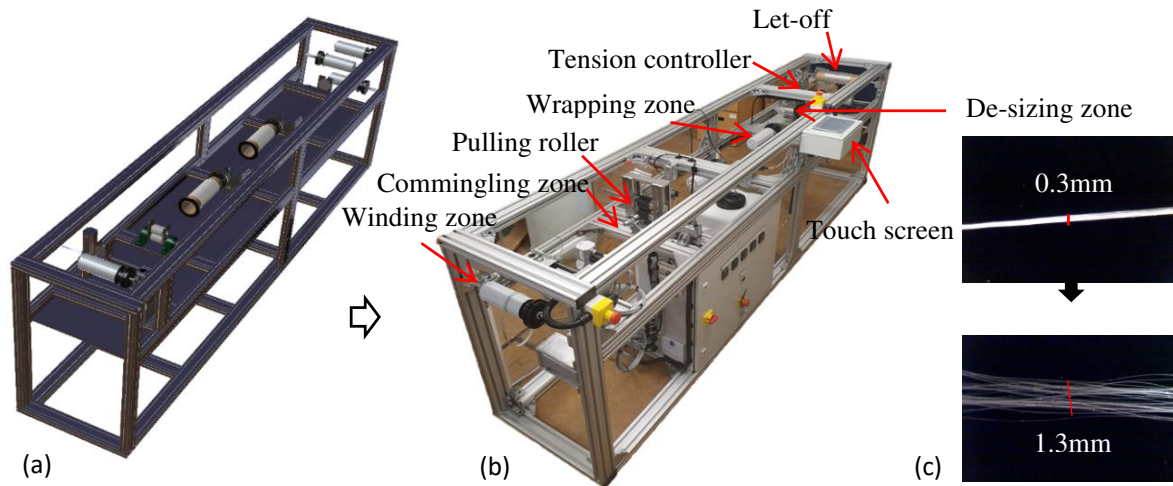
Machine development process to manufacture hybrid yarns: (a) initial CAD drawing, (b) actual machine and (c) PP fibre after and before the de-sizing process
